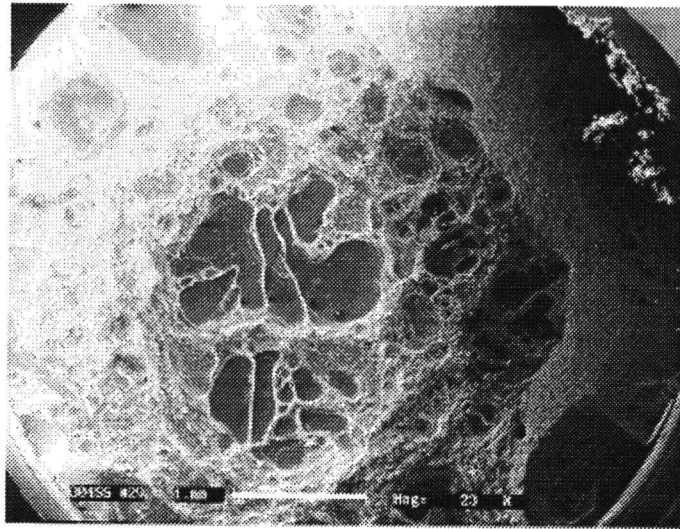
Fracture surface of Nitronic 50 steel CodeM34 run No.29
